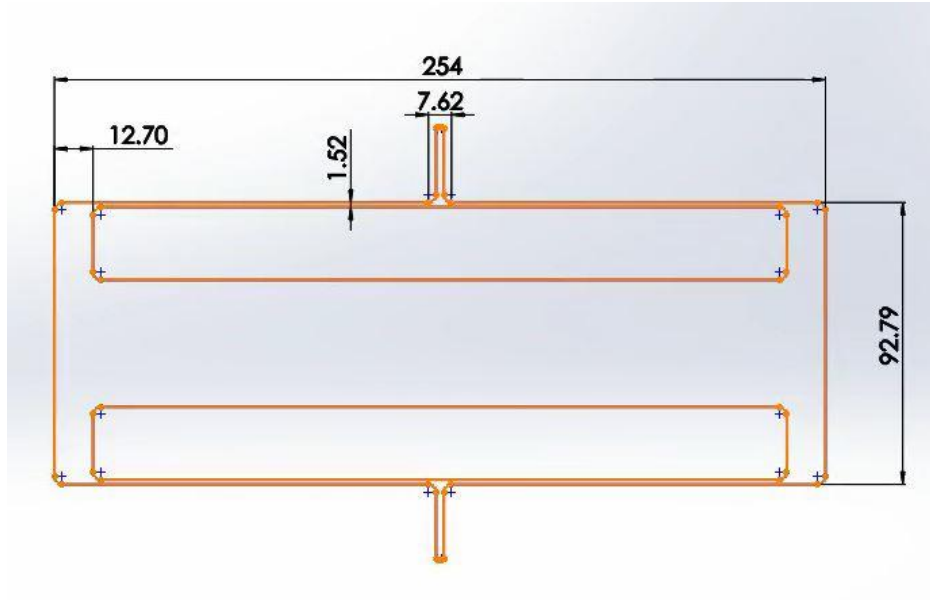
SolidWorks drawing of the essentially nonlinear spring with important dimensions shown in mm.
